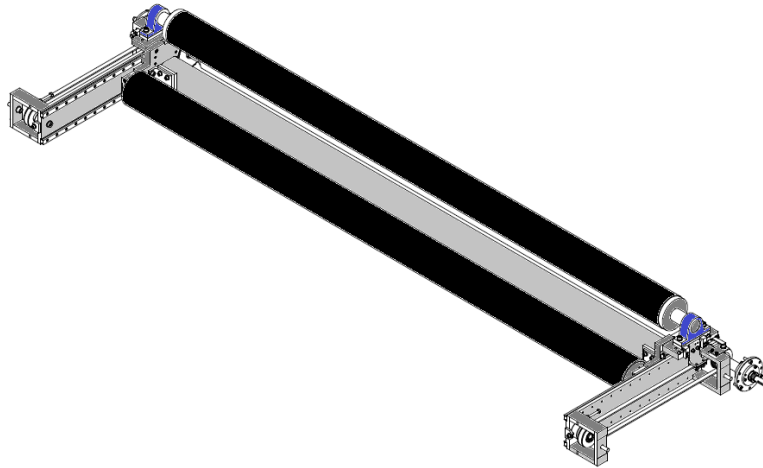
Overview drawing of rewind layarm assembly.
